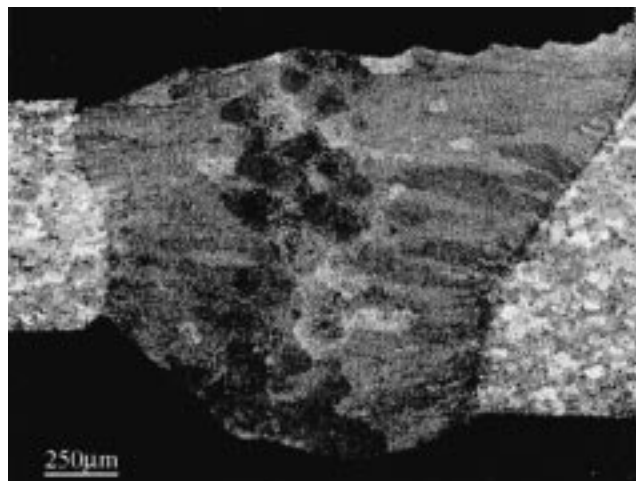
Weld zone in the AA5182 twb after tensile deformation
